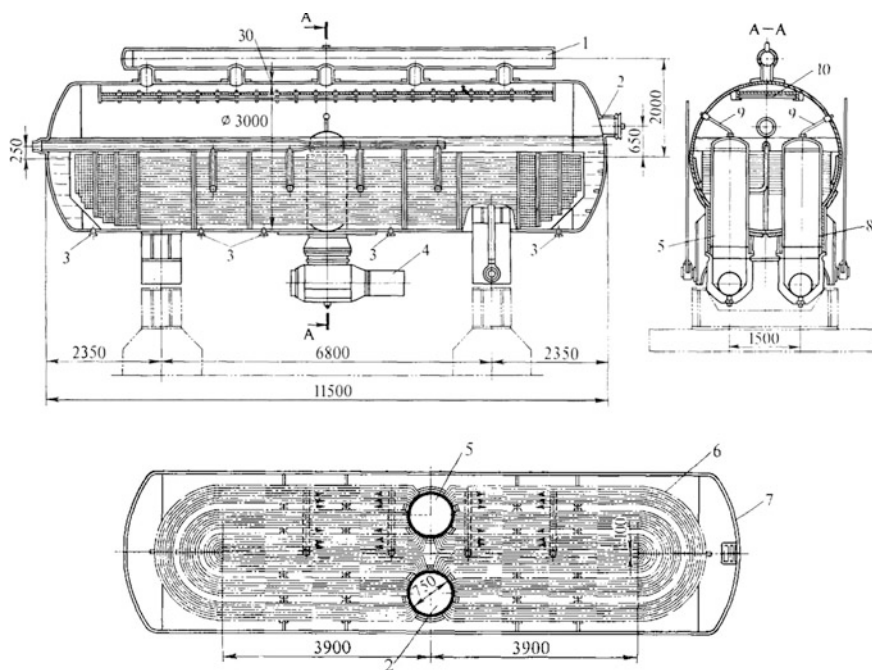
Steam generator design. 1 steam header, 2 manhole, 3 blow-down and drainage fittings, 4 MCP nozzle, 5 inlet header, 6 heating surface, 7 steam generator shell, 8 outlet header, 9 primary air vent and 10 louvre separator
